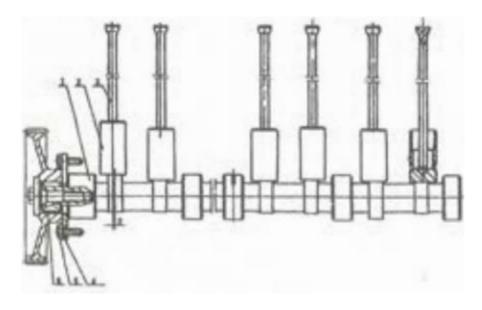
Camshaft assembly 1 camshaft 2 thrust column 3 push rod 4 camshaft thrust plate 5 bolt 6 key
